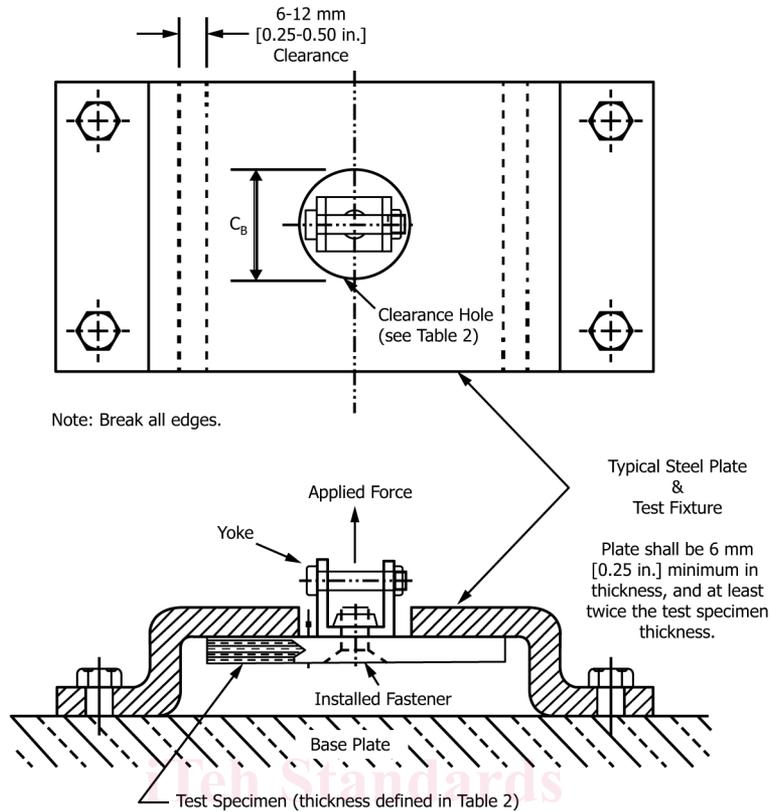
Fastener Pull-Through Test Fixture, Procedure B
